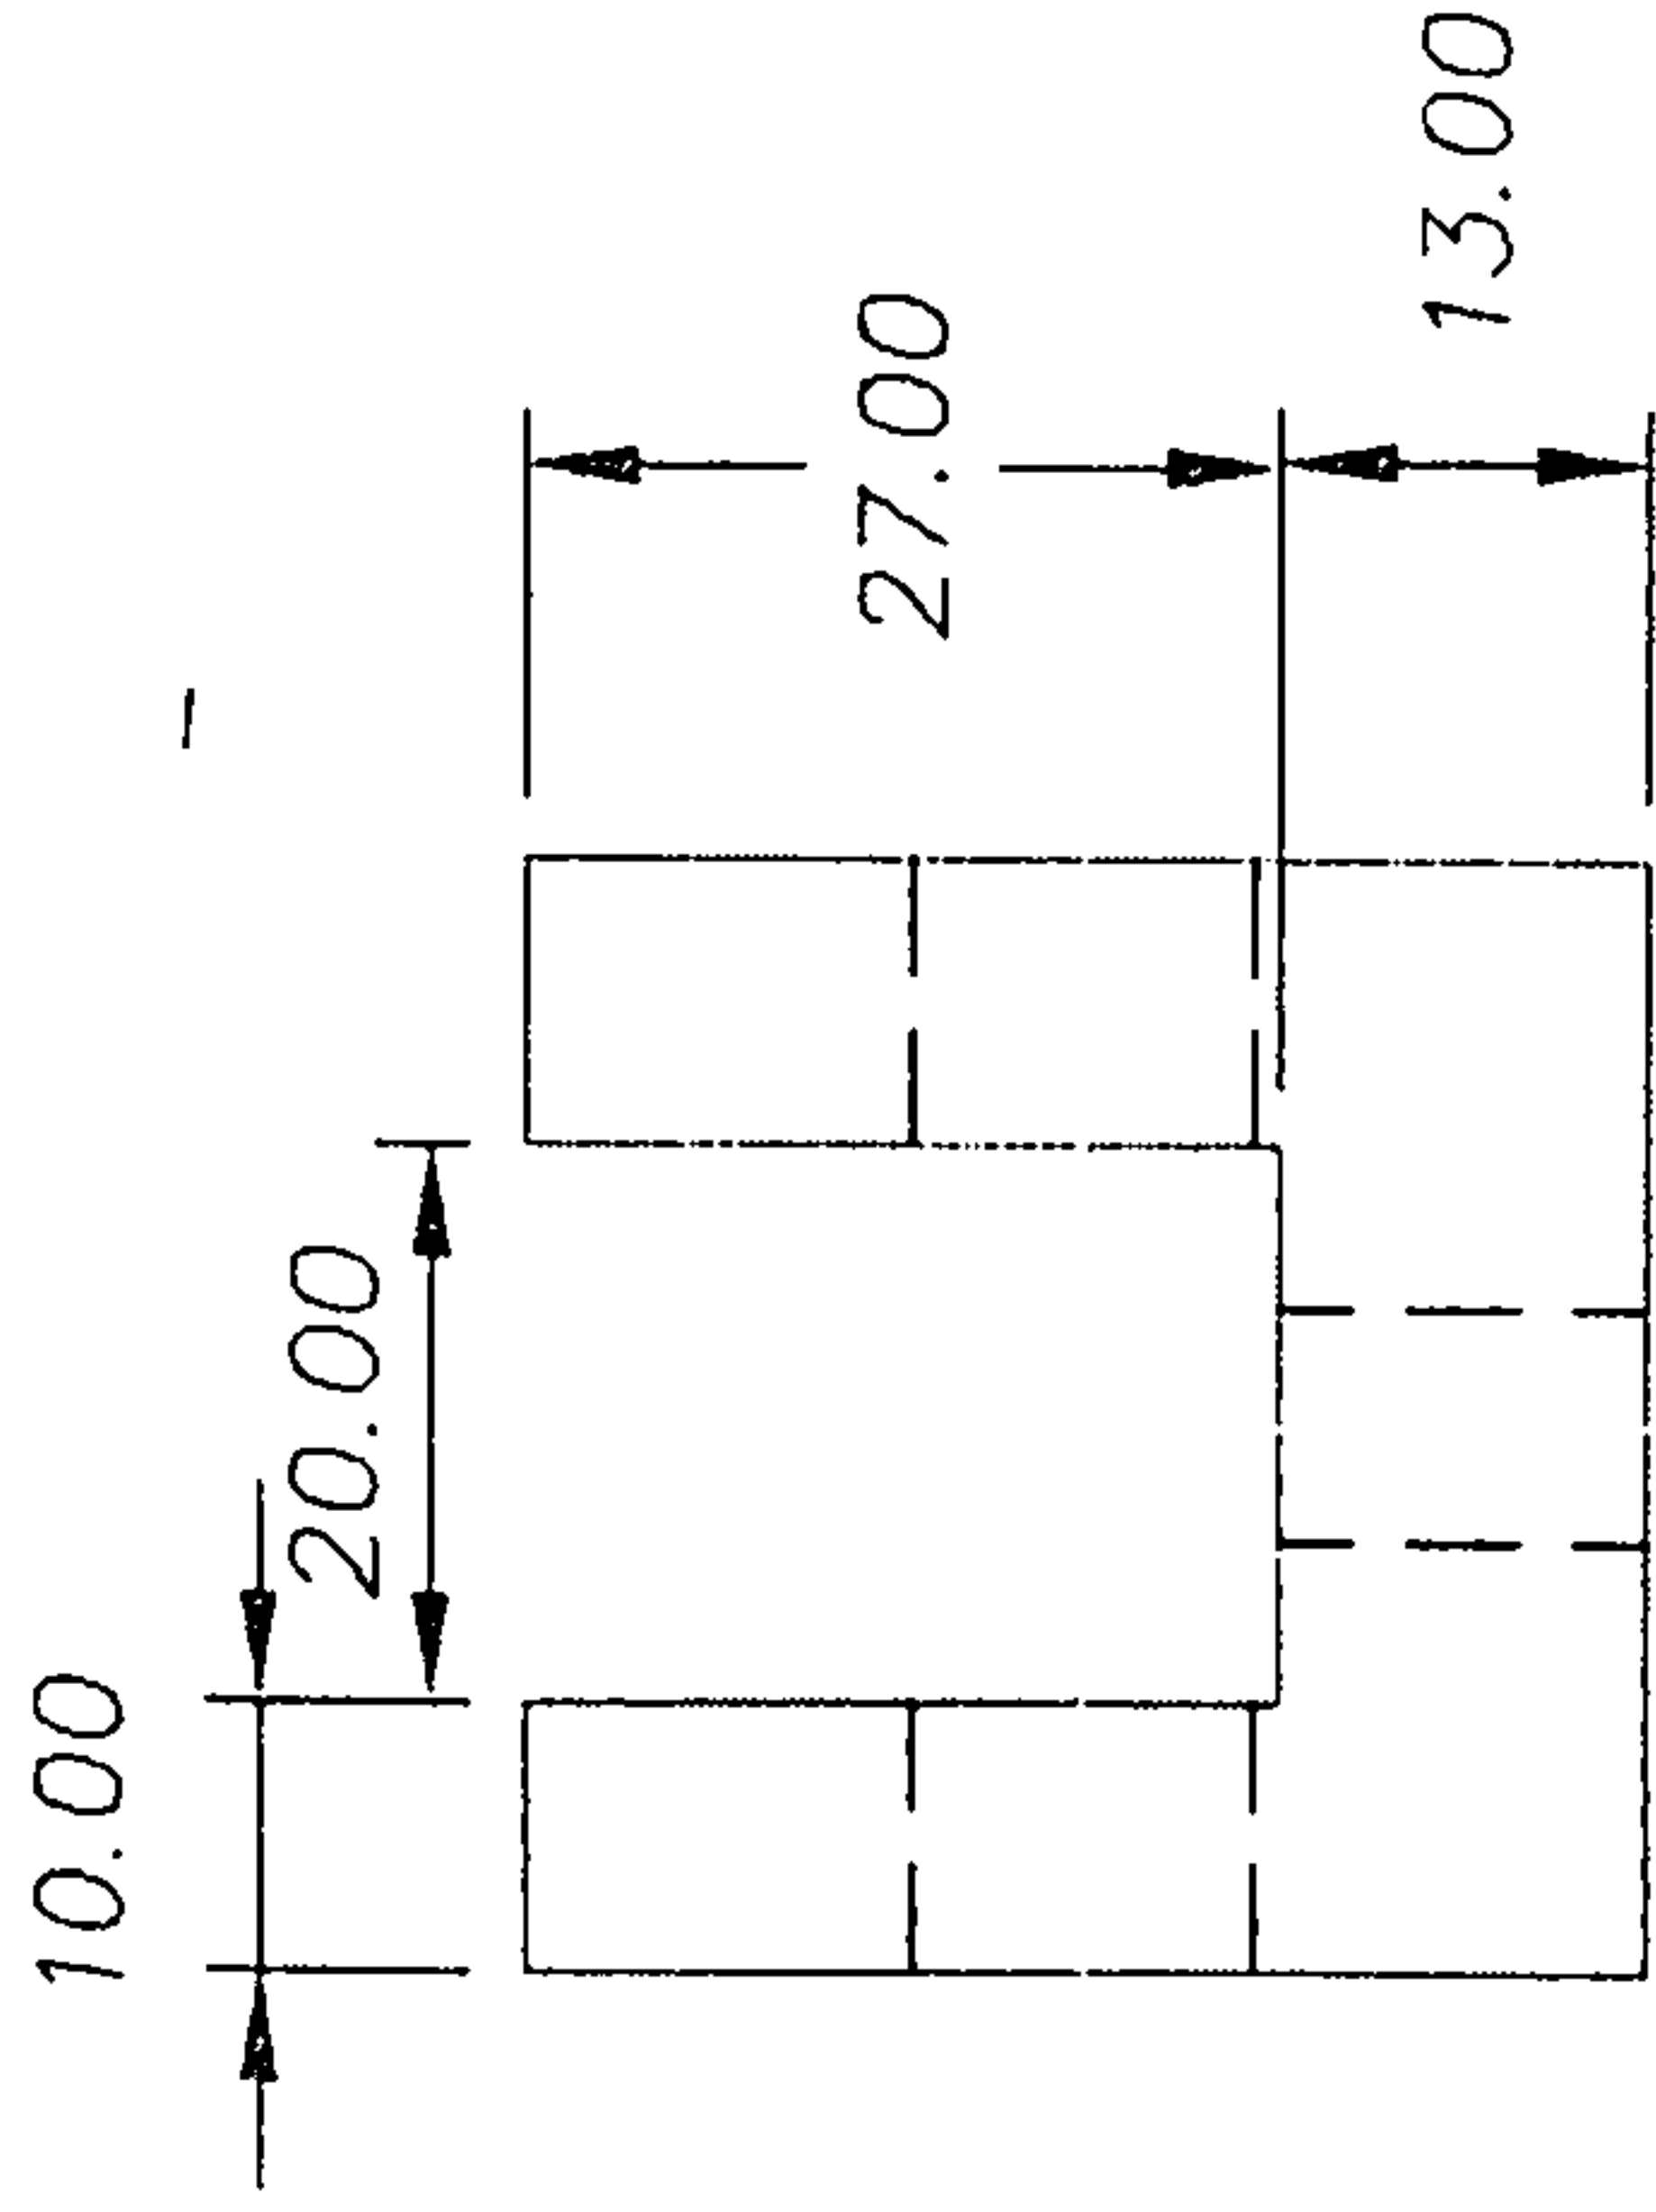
shows mounting blocks used to fix striker forks to Cranfield (DCMT's) droptower. Different machines will require different fixtures.
